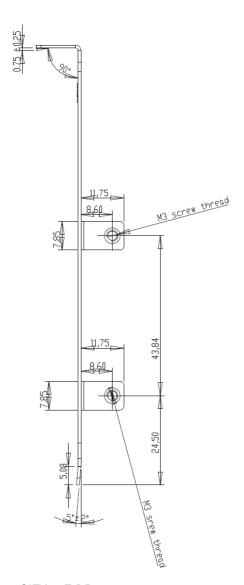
Dimensions Front Panel CIFX 50-DP or CIFX 50E-DP
